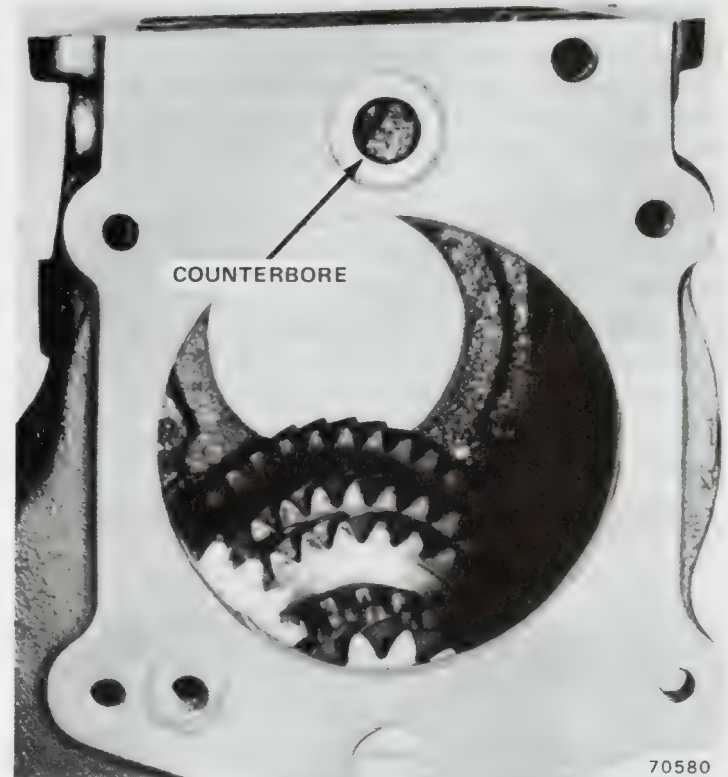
B-53 Shift Rail Oil Seal Counterbore Location
